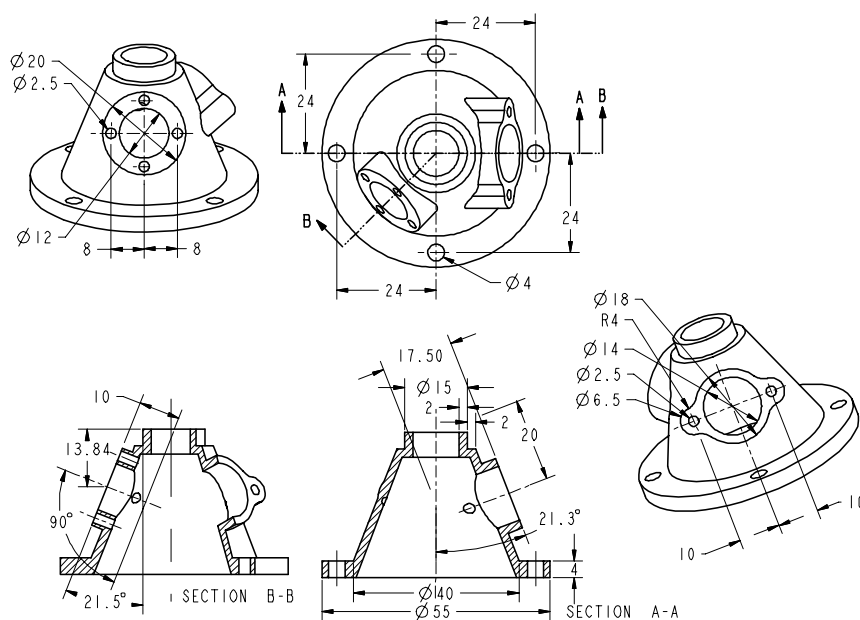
Top view, front section view, and the two auxiliary views of the model
